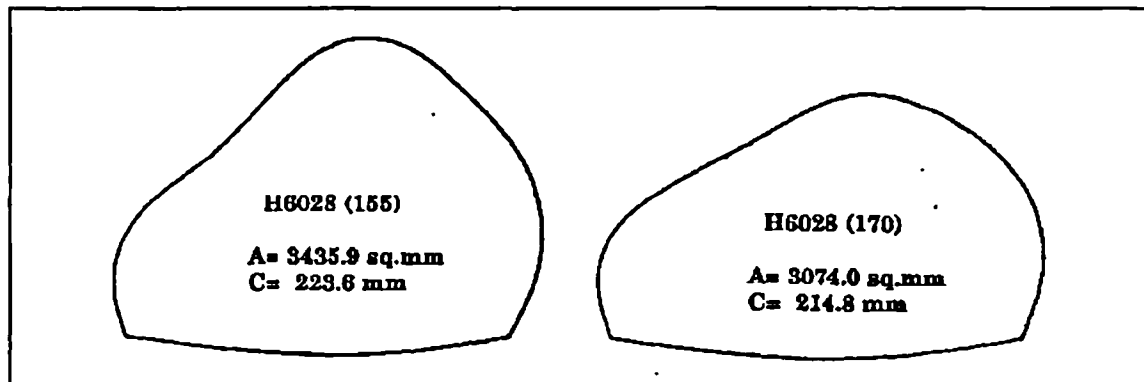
(A): EXAMPLES OF TWO LAST (H6028) CROSS-SECTIONS.
